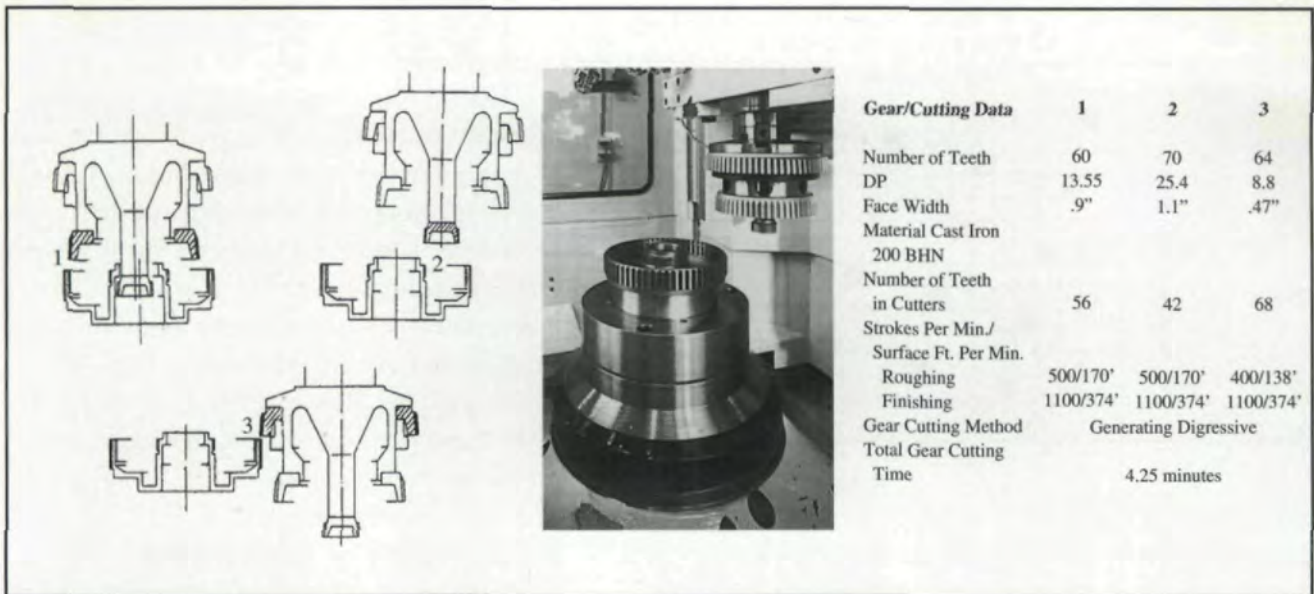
Planetary gear housing with three gearing elements being cut in a single setup (spurs).
